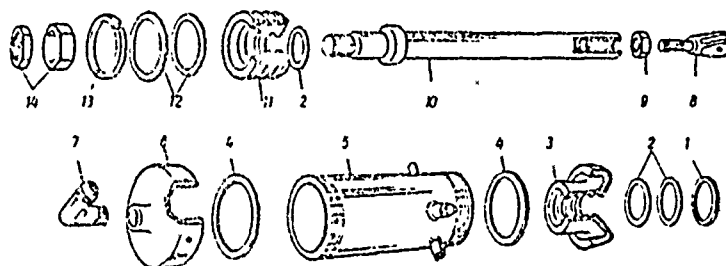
The standard pneumatic cylinder for control of the valve and brake 1956-1962 issue:
